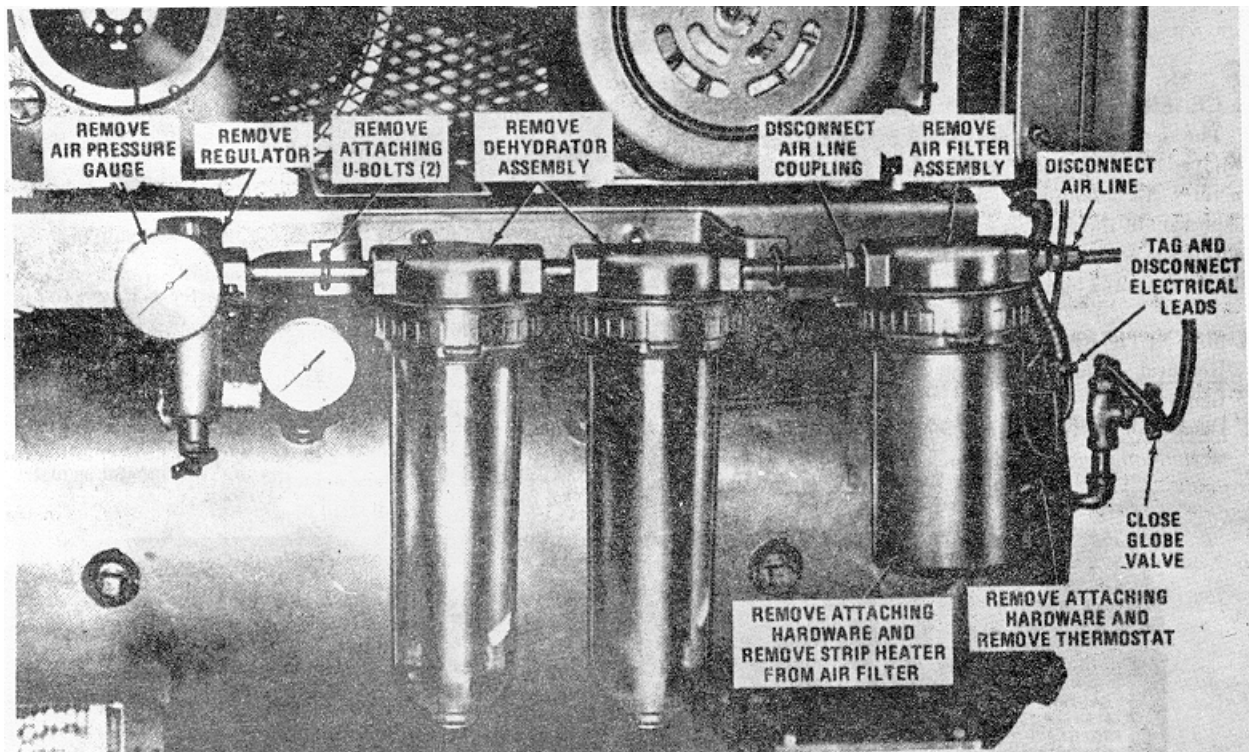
Air filter, strip heater, thermostat hydrator and regulator, removal and installation
